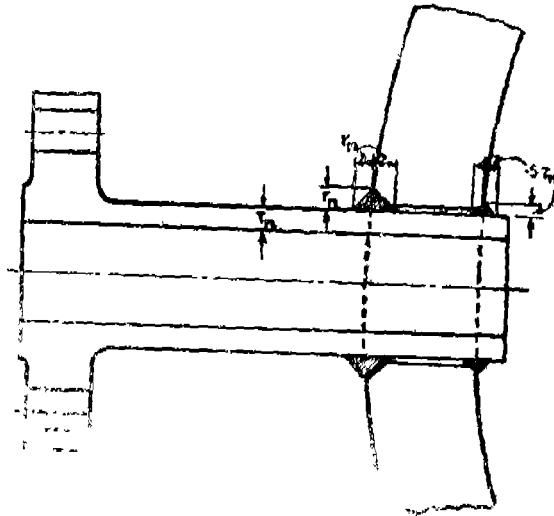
Minimum weld attachment for stand pipes 2 in. bore and under.
